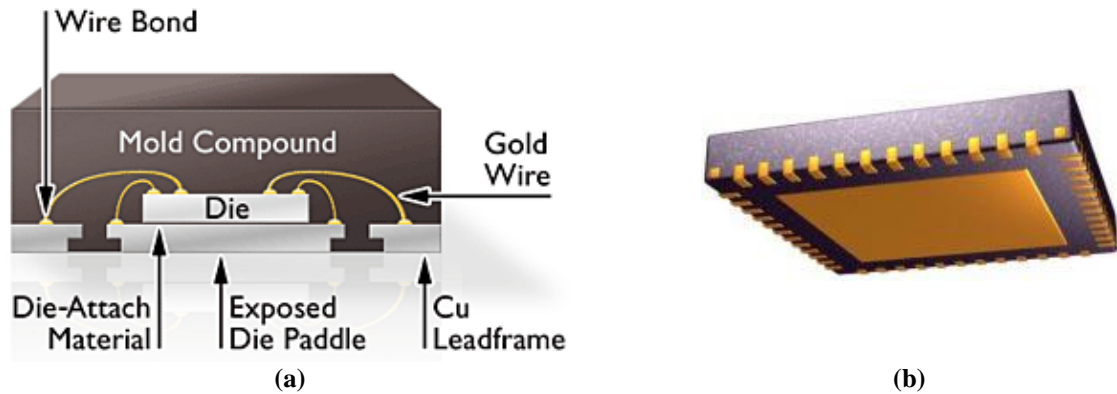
Example of HVQFN cutaway view (a) and bottom view (b)
